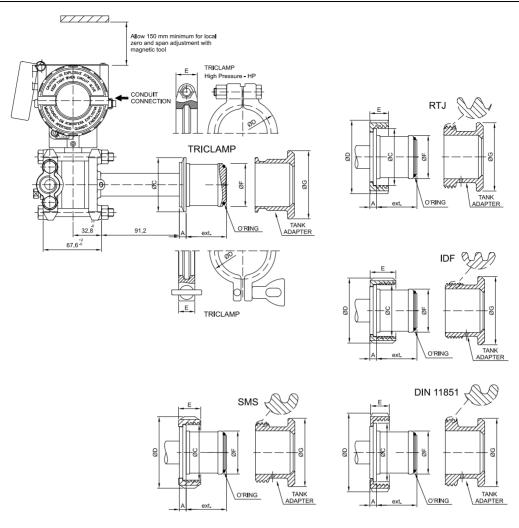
(e) – Dimensional Drawing and Mounting Position - Sanitary Transmitter without Extension
